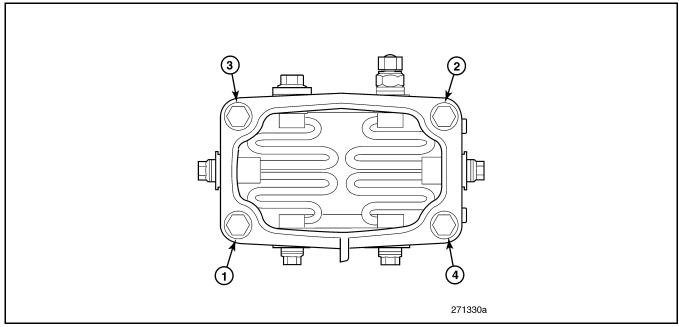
Torque Sequence — EGR Mixer and Inlet Air Heater/Spacer Mounting
